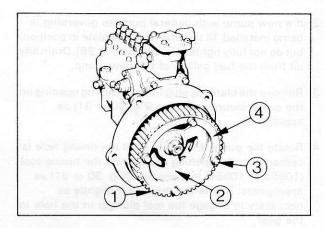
Injection Pump Drive Gear - General Purpose Governed Pumps Only
